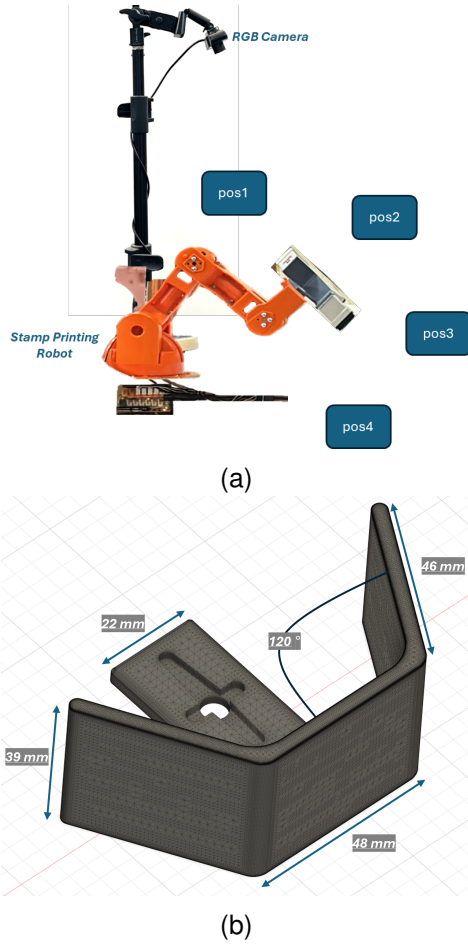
(a) Developed stamp printing robot with gripper (b) 3D model of the stamp printing gripper
